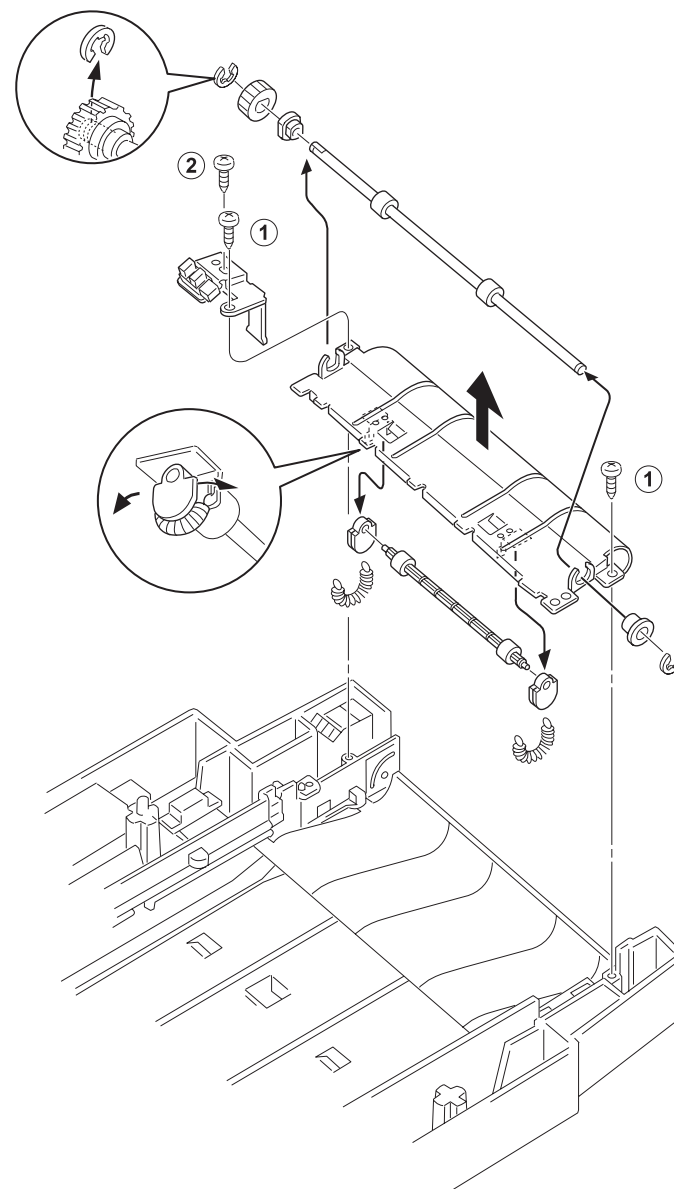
Roll Assembly #1/Pinch Roll Removal
